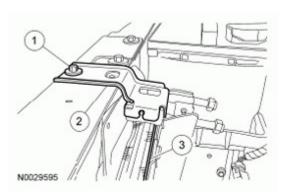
Identifying Cable Routing Clip And Hood Latch Bolts Courtesy of FORD MOTOR CO.
